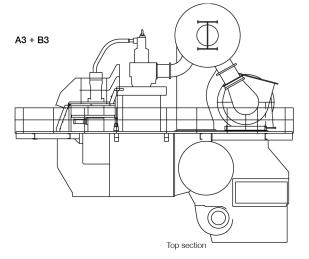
Dispatch pattern, engine with turbocharger on exhaust side (4 59 123)
